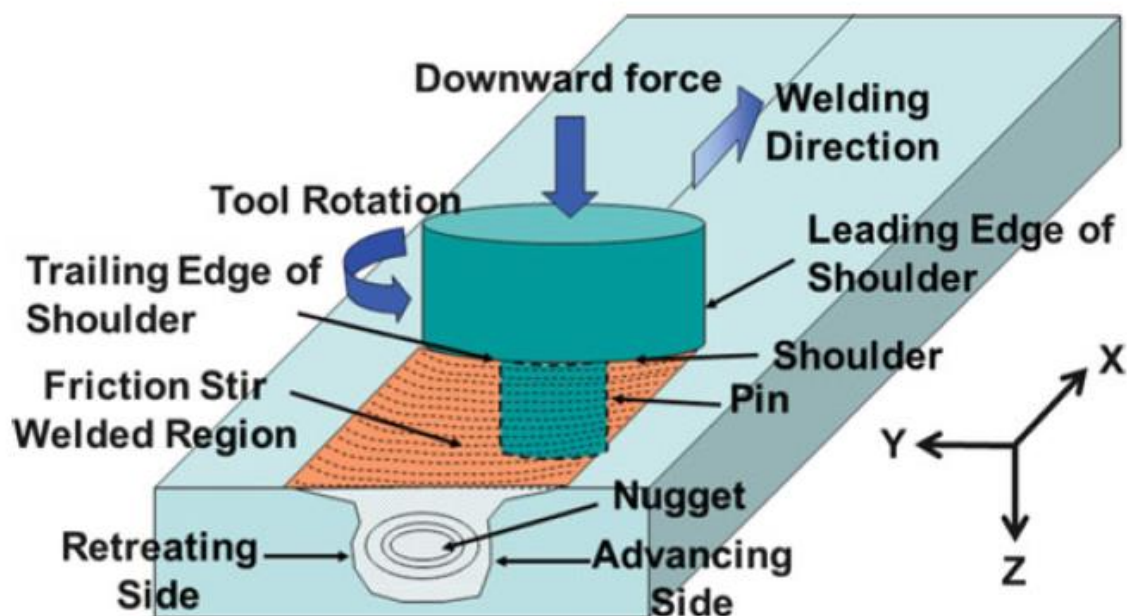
General Schematic of FSW Process in Butt Welding Configuration [Mishra et. al., 2014].
